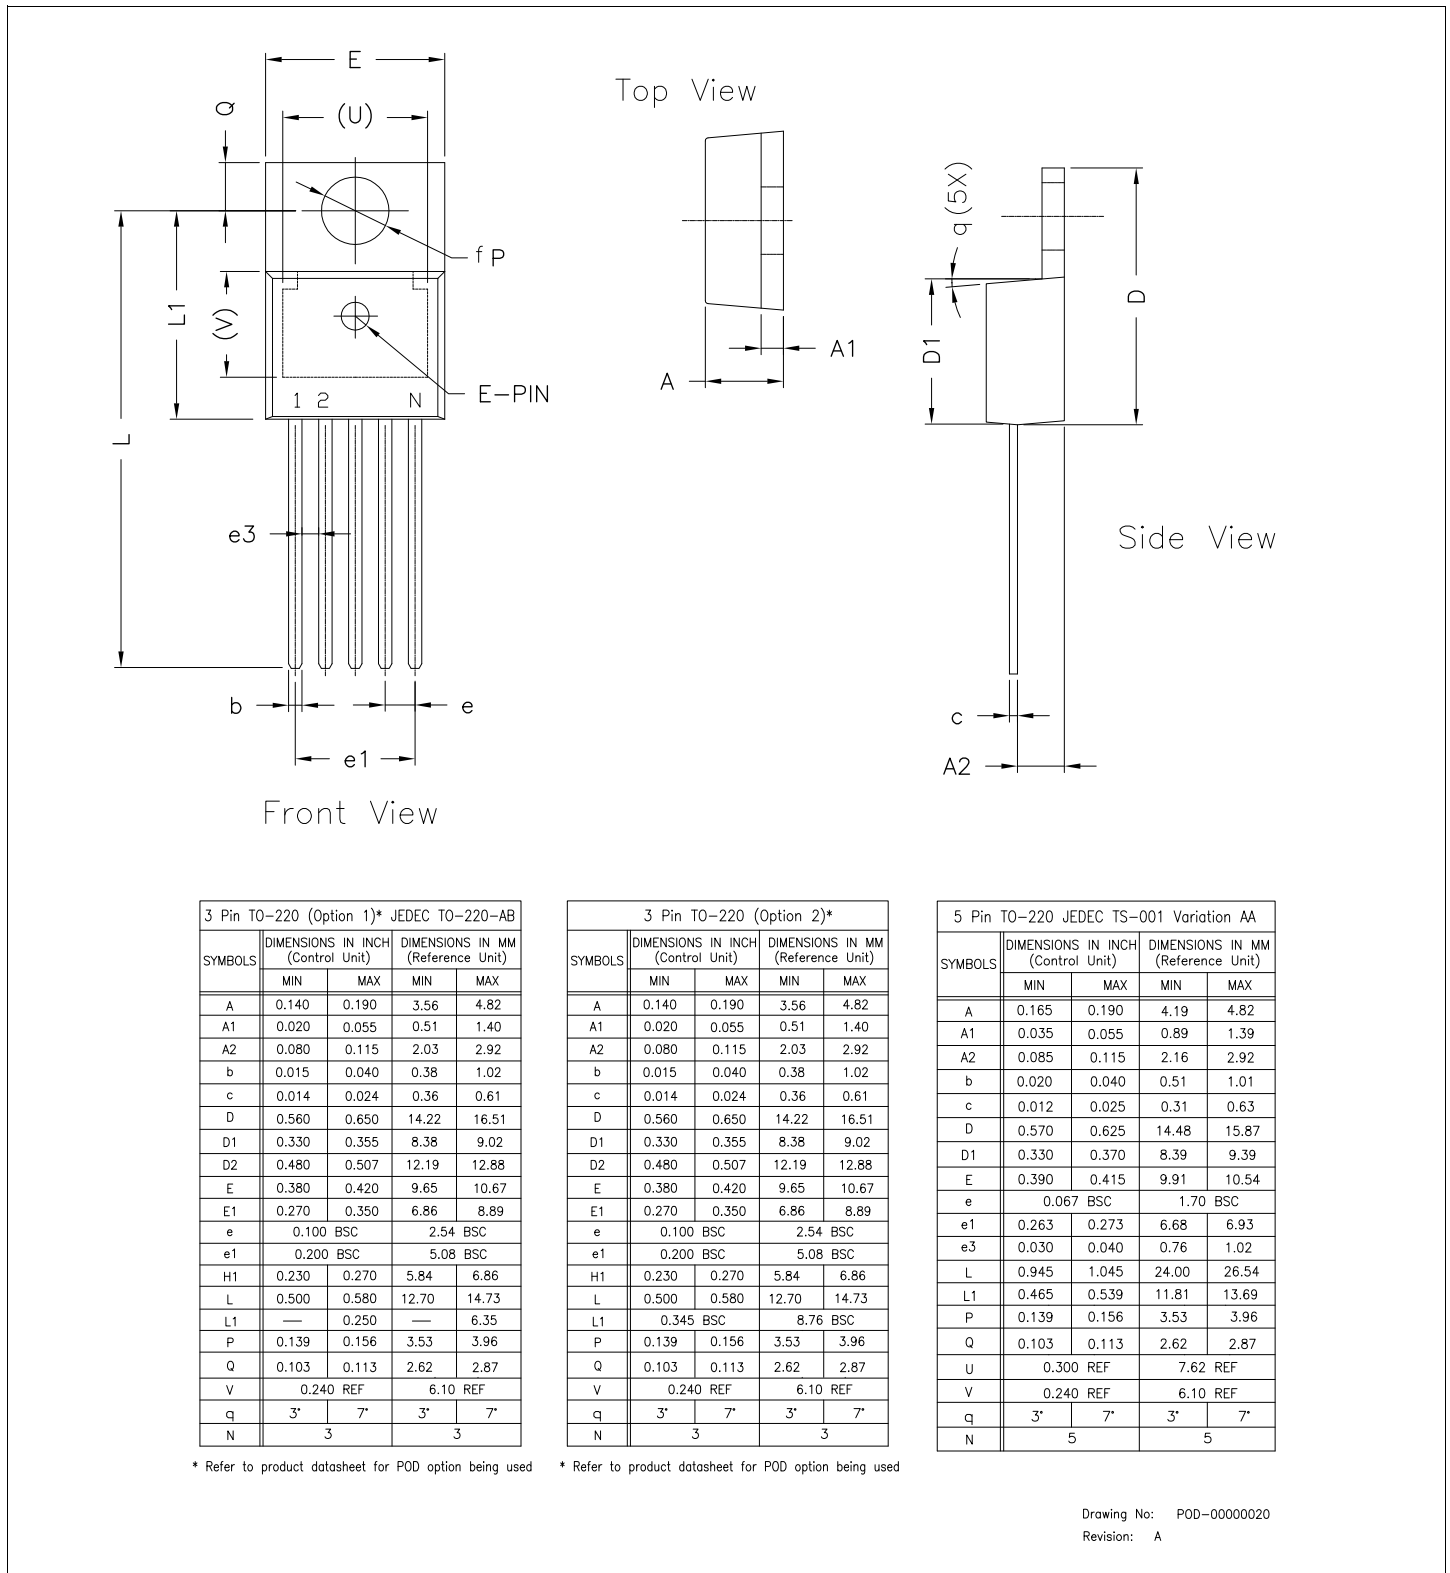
SPX2815 Mechanical Dimensions-3-Pin TO-220
